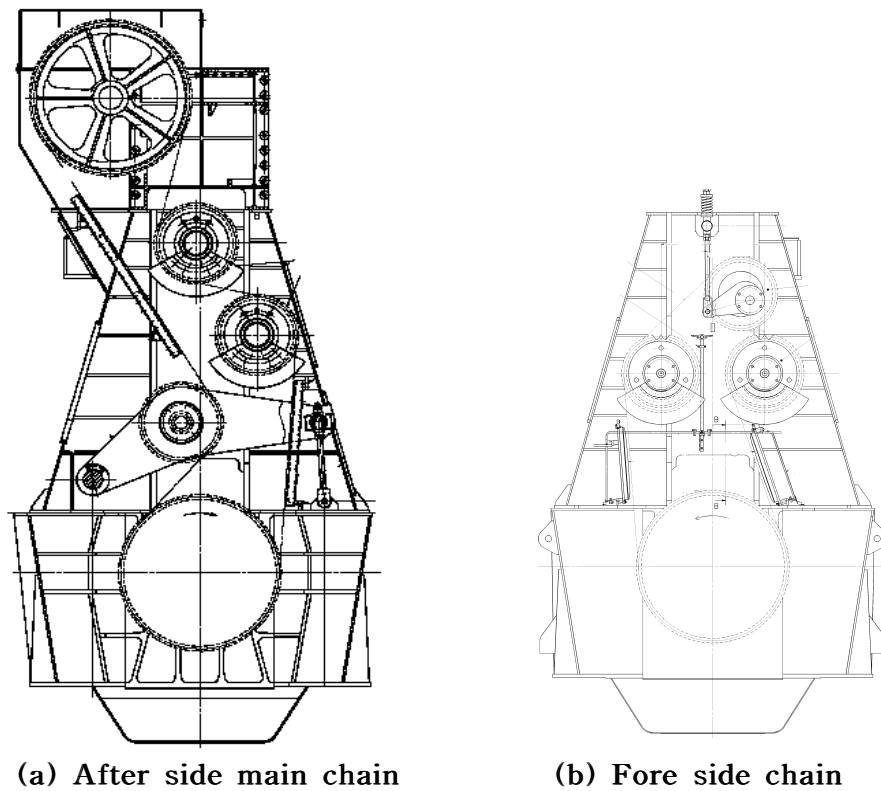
Chain drive system of MAN B&W S70MC-C engine
